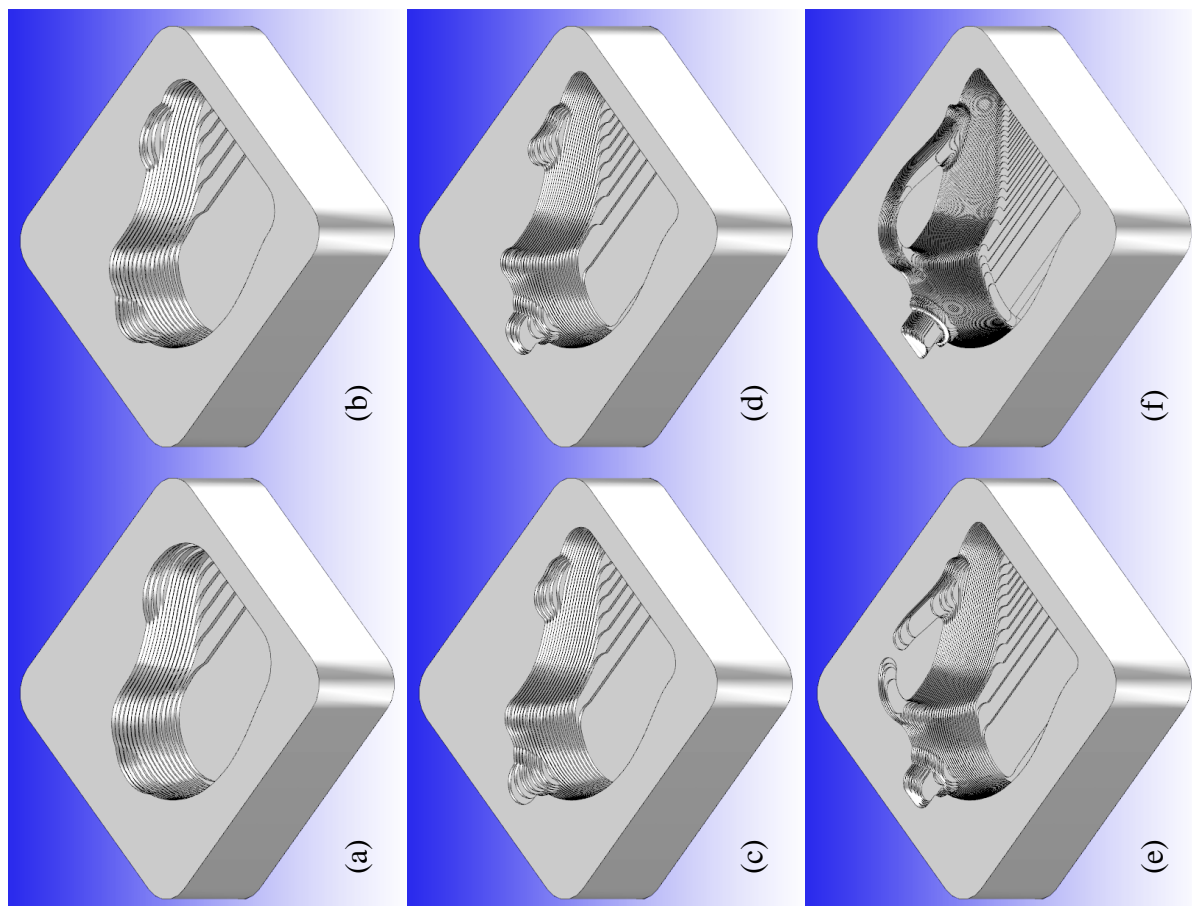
Shapes of cavity rough machining for the optimal tool sequence. (a) Shape after first tool ($d = 80$ mm). (b) Shape after second tool ($d = 50$ mm). (c) Shape after third tool ($d = 36$ mm). (d) Shape after fourth tool ($d = 25$ mm). (e) Shape after fifth tool ($d = 20$ mm). (f) Shape after sixth tool ($d = 10$ mm).
